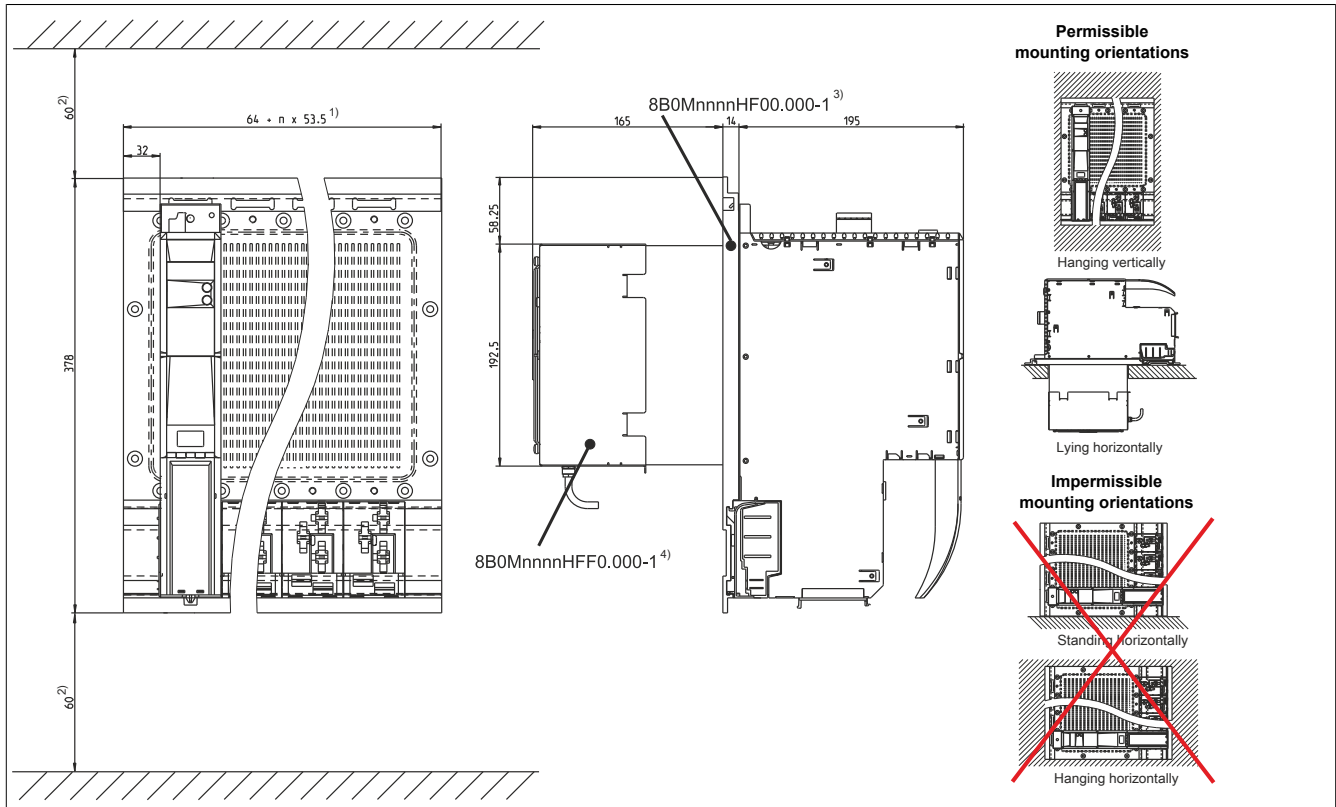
Feed-through mounting - Dimension diagram and installation dimensions
